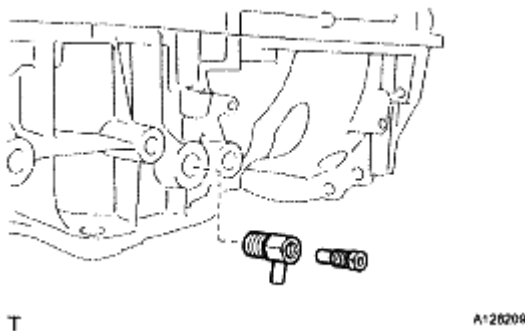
Identifying Cylinder Block Water Drain Cock Sub-Assembly
